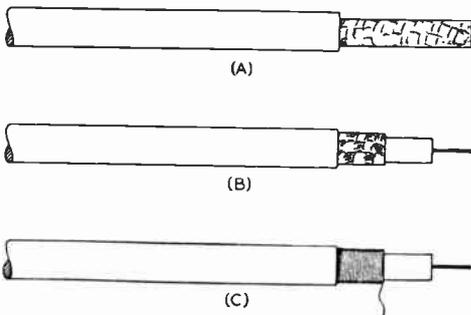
Method of preparing the end of coaxial cable. In A the outer insulating covering has been removed. At B the metal braid has been cut back, and in C the remaining exposed braid has been wrapped with small-size tinned wire. When completed, solder should be flowed over this winding.
